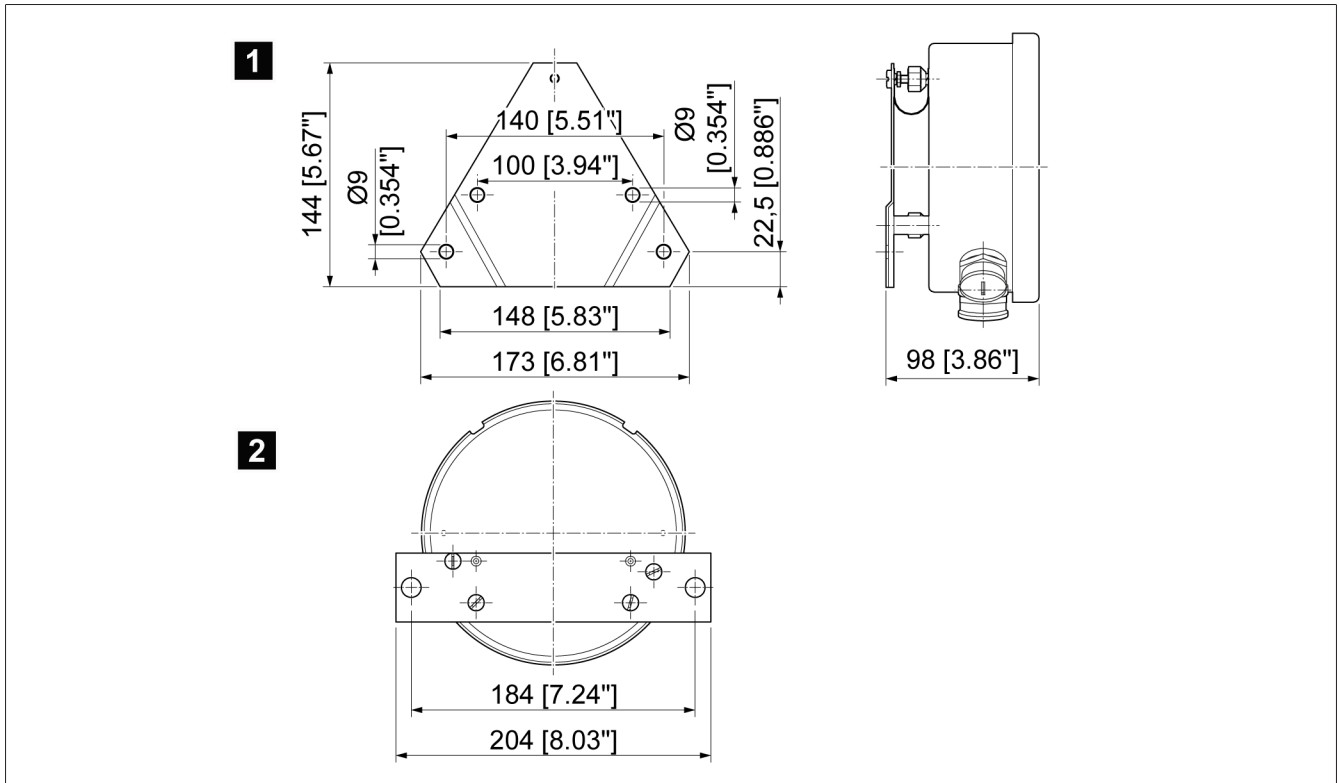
Dimensional drawing for vibration-damping plate and mounting plate
